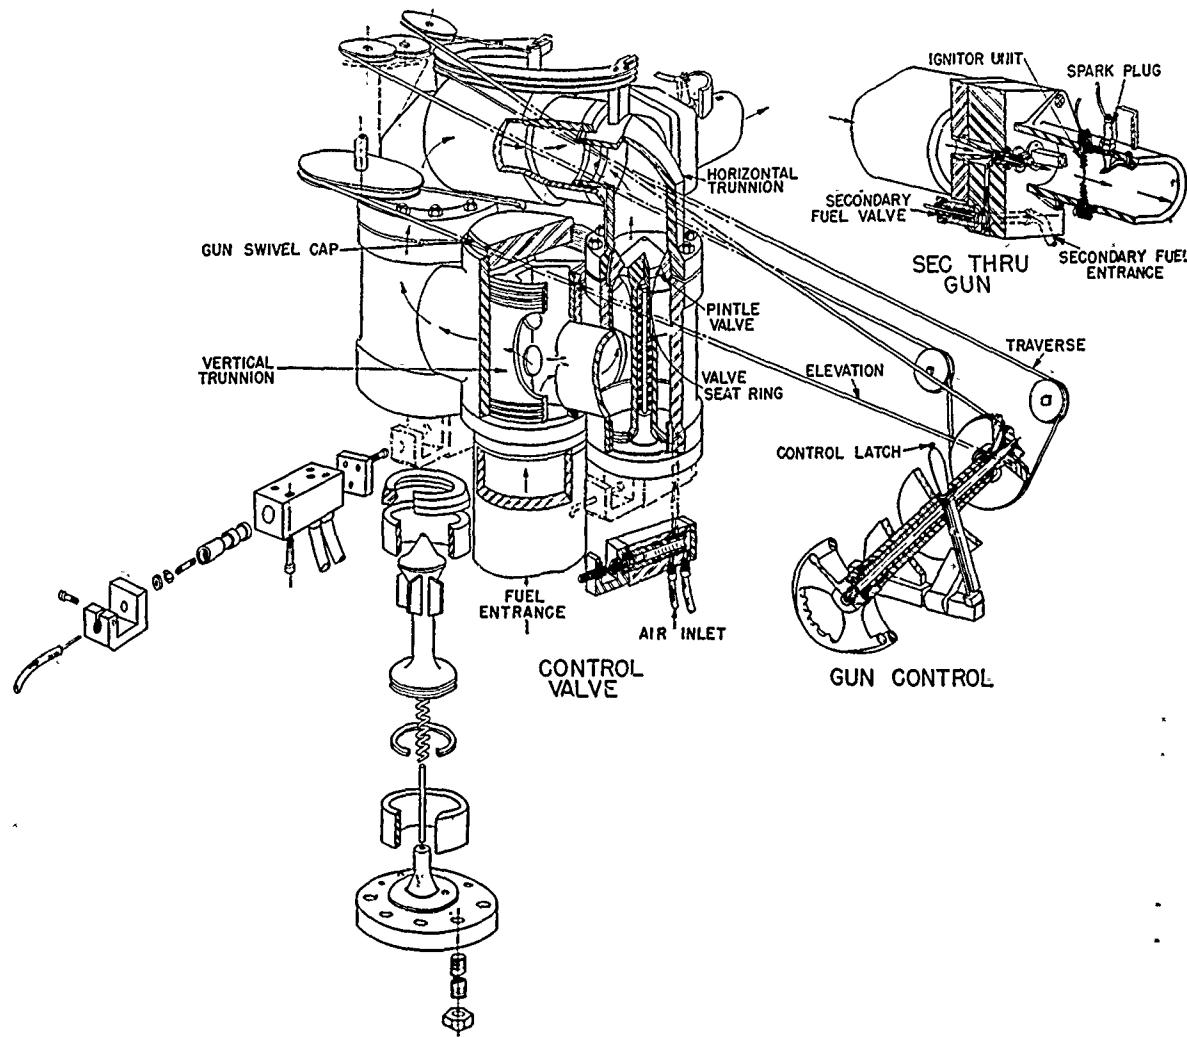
E9 prototype flame-thrower gun showing the controlling mechanism.
